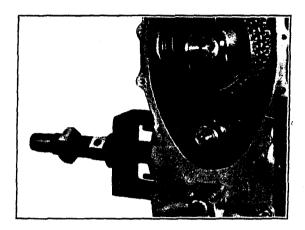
Puller 66869 for Water Pump Drive Shaft Bushings
